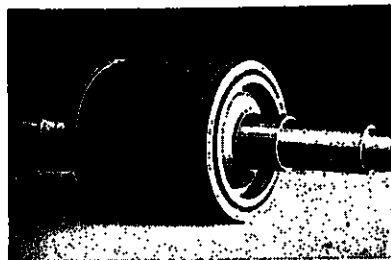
Rotor with two squirrel cage windings, for motor of 10 h.p., 1,500 r.p.m.
